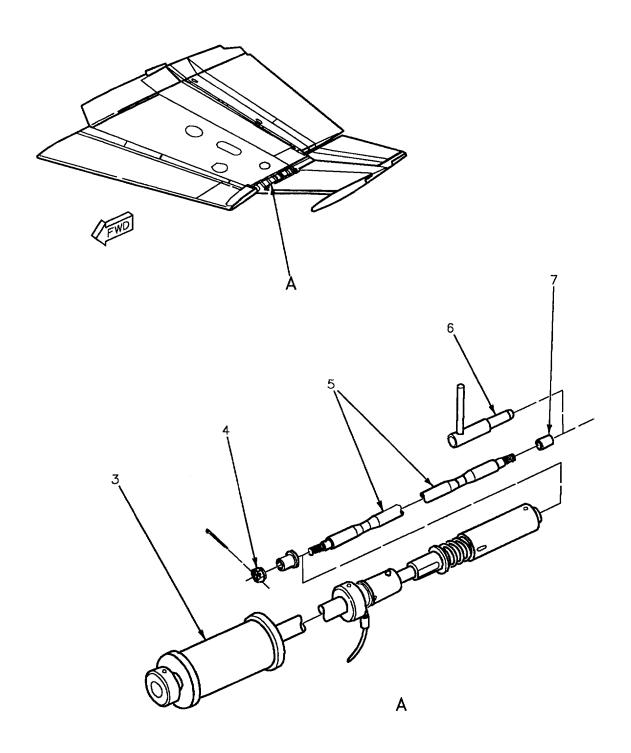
Removal of Outer Wing with Damaged Wing Fold Transmission (Sheet 1)
